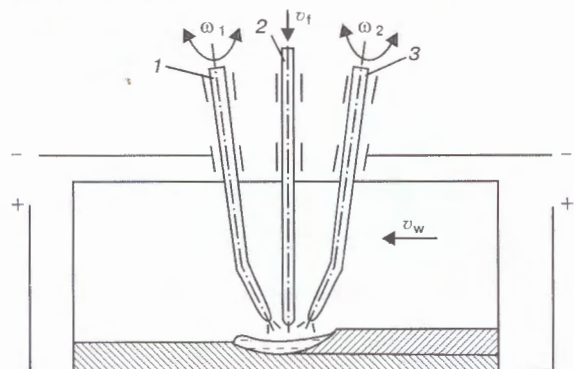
Technological diagram of the process of welding with non-consumable electrode: 1, 3 — bent tungsten electrodes; 2 — filler wire; ω_1 , ω_2 — angular rates of rotation of front and rear tungsten electrodes, respectively; v_f — filler wire feed speed
